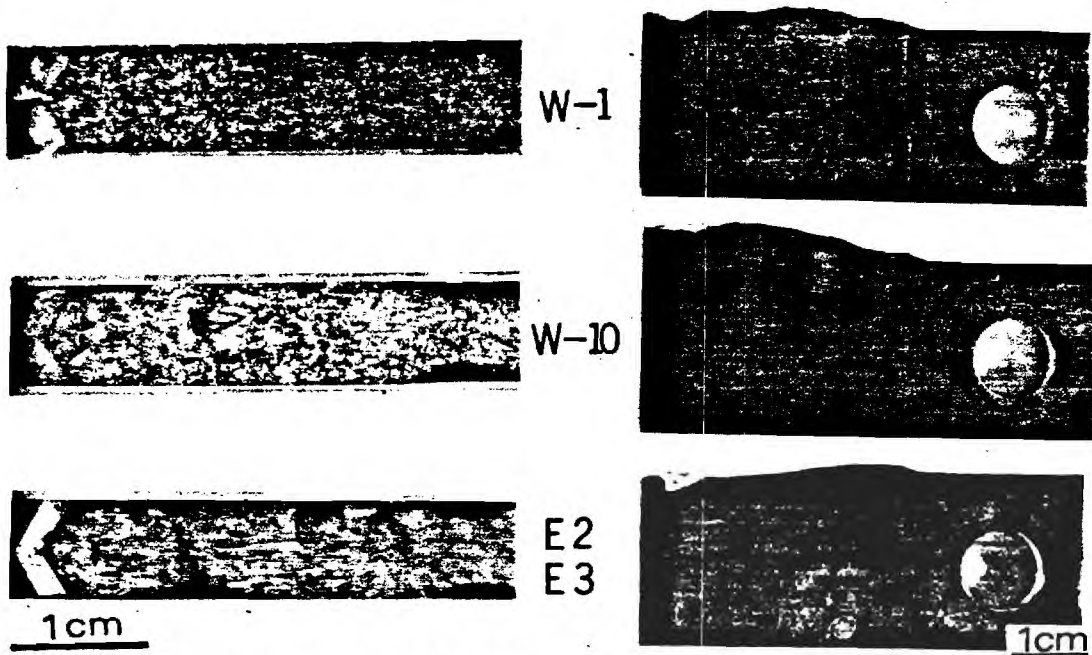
Macroscopic view of crack path and fracture topography for the materials tested.
